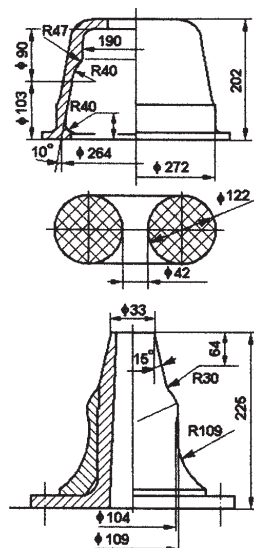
Dimensional data of a Clouth-type spring components [2]
